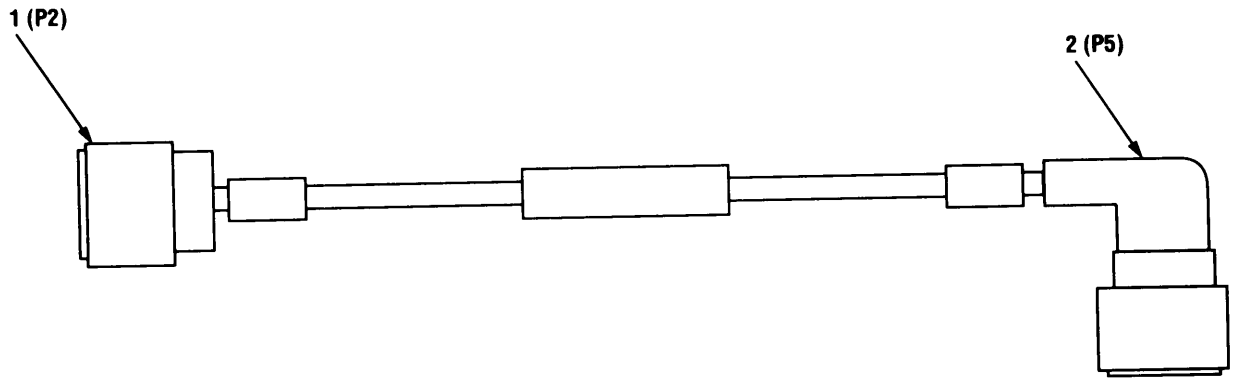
Cable Assembly, W53 (1-94296.0000//B)
